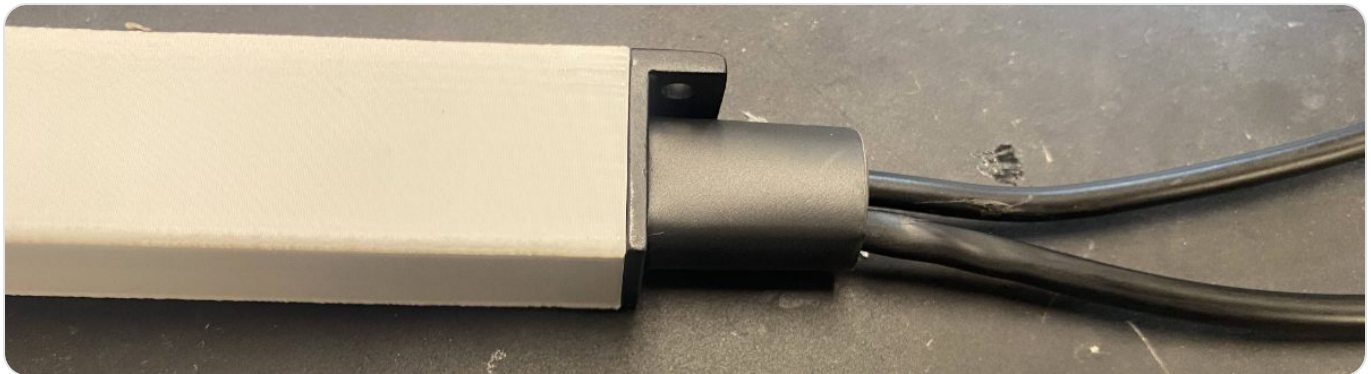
Heat-shrink tubing positioned over the input cables, against the Magpie sled.
